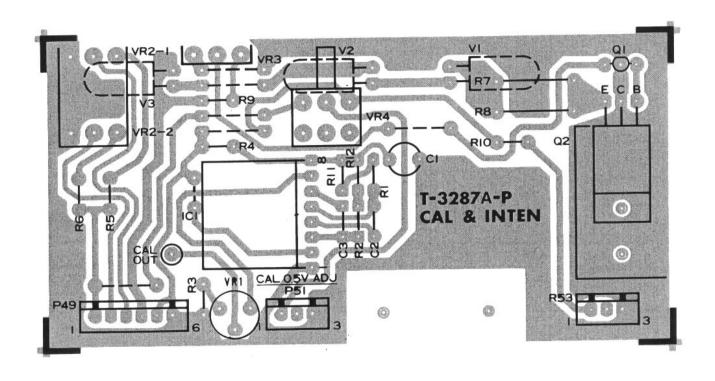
LBO-516 Calibrator and Intensity P.C. Board T-3287A
